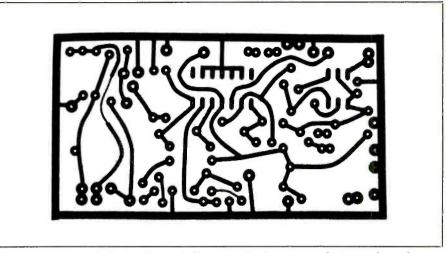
Actual-size etching drilling guide for printed-circuit board.
